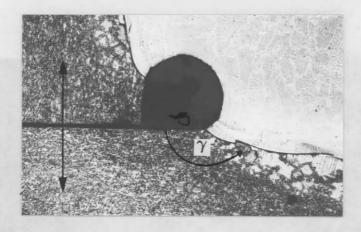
Incomplete joint penetration of a fillet weld in a FLNFT test specimen welded with a 309L filler metal. The direction of the principal stress during tensile loading is indicated (35X).
